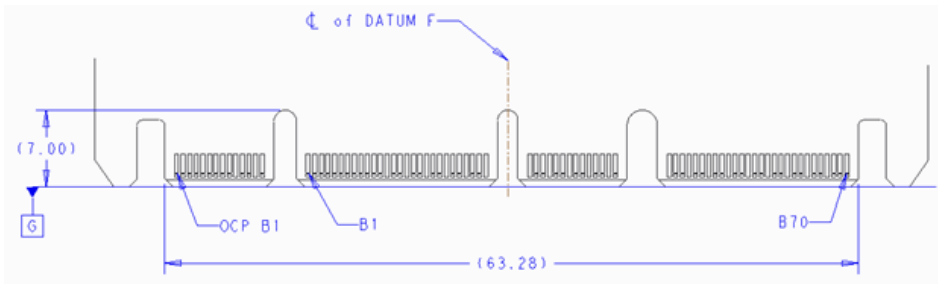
Small Size Primary Connector Gold Finger Dimensions – x16 – Bottom Side (“A” Pins)
